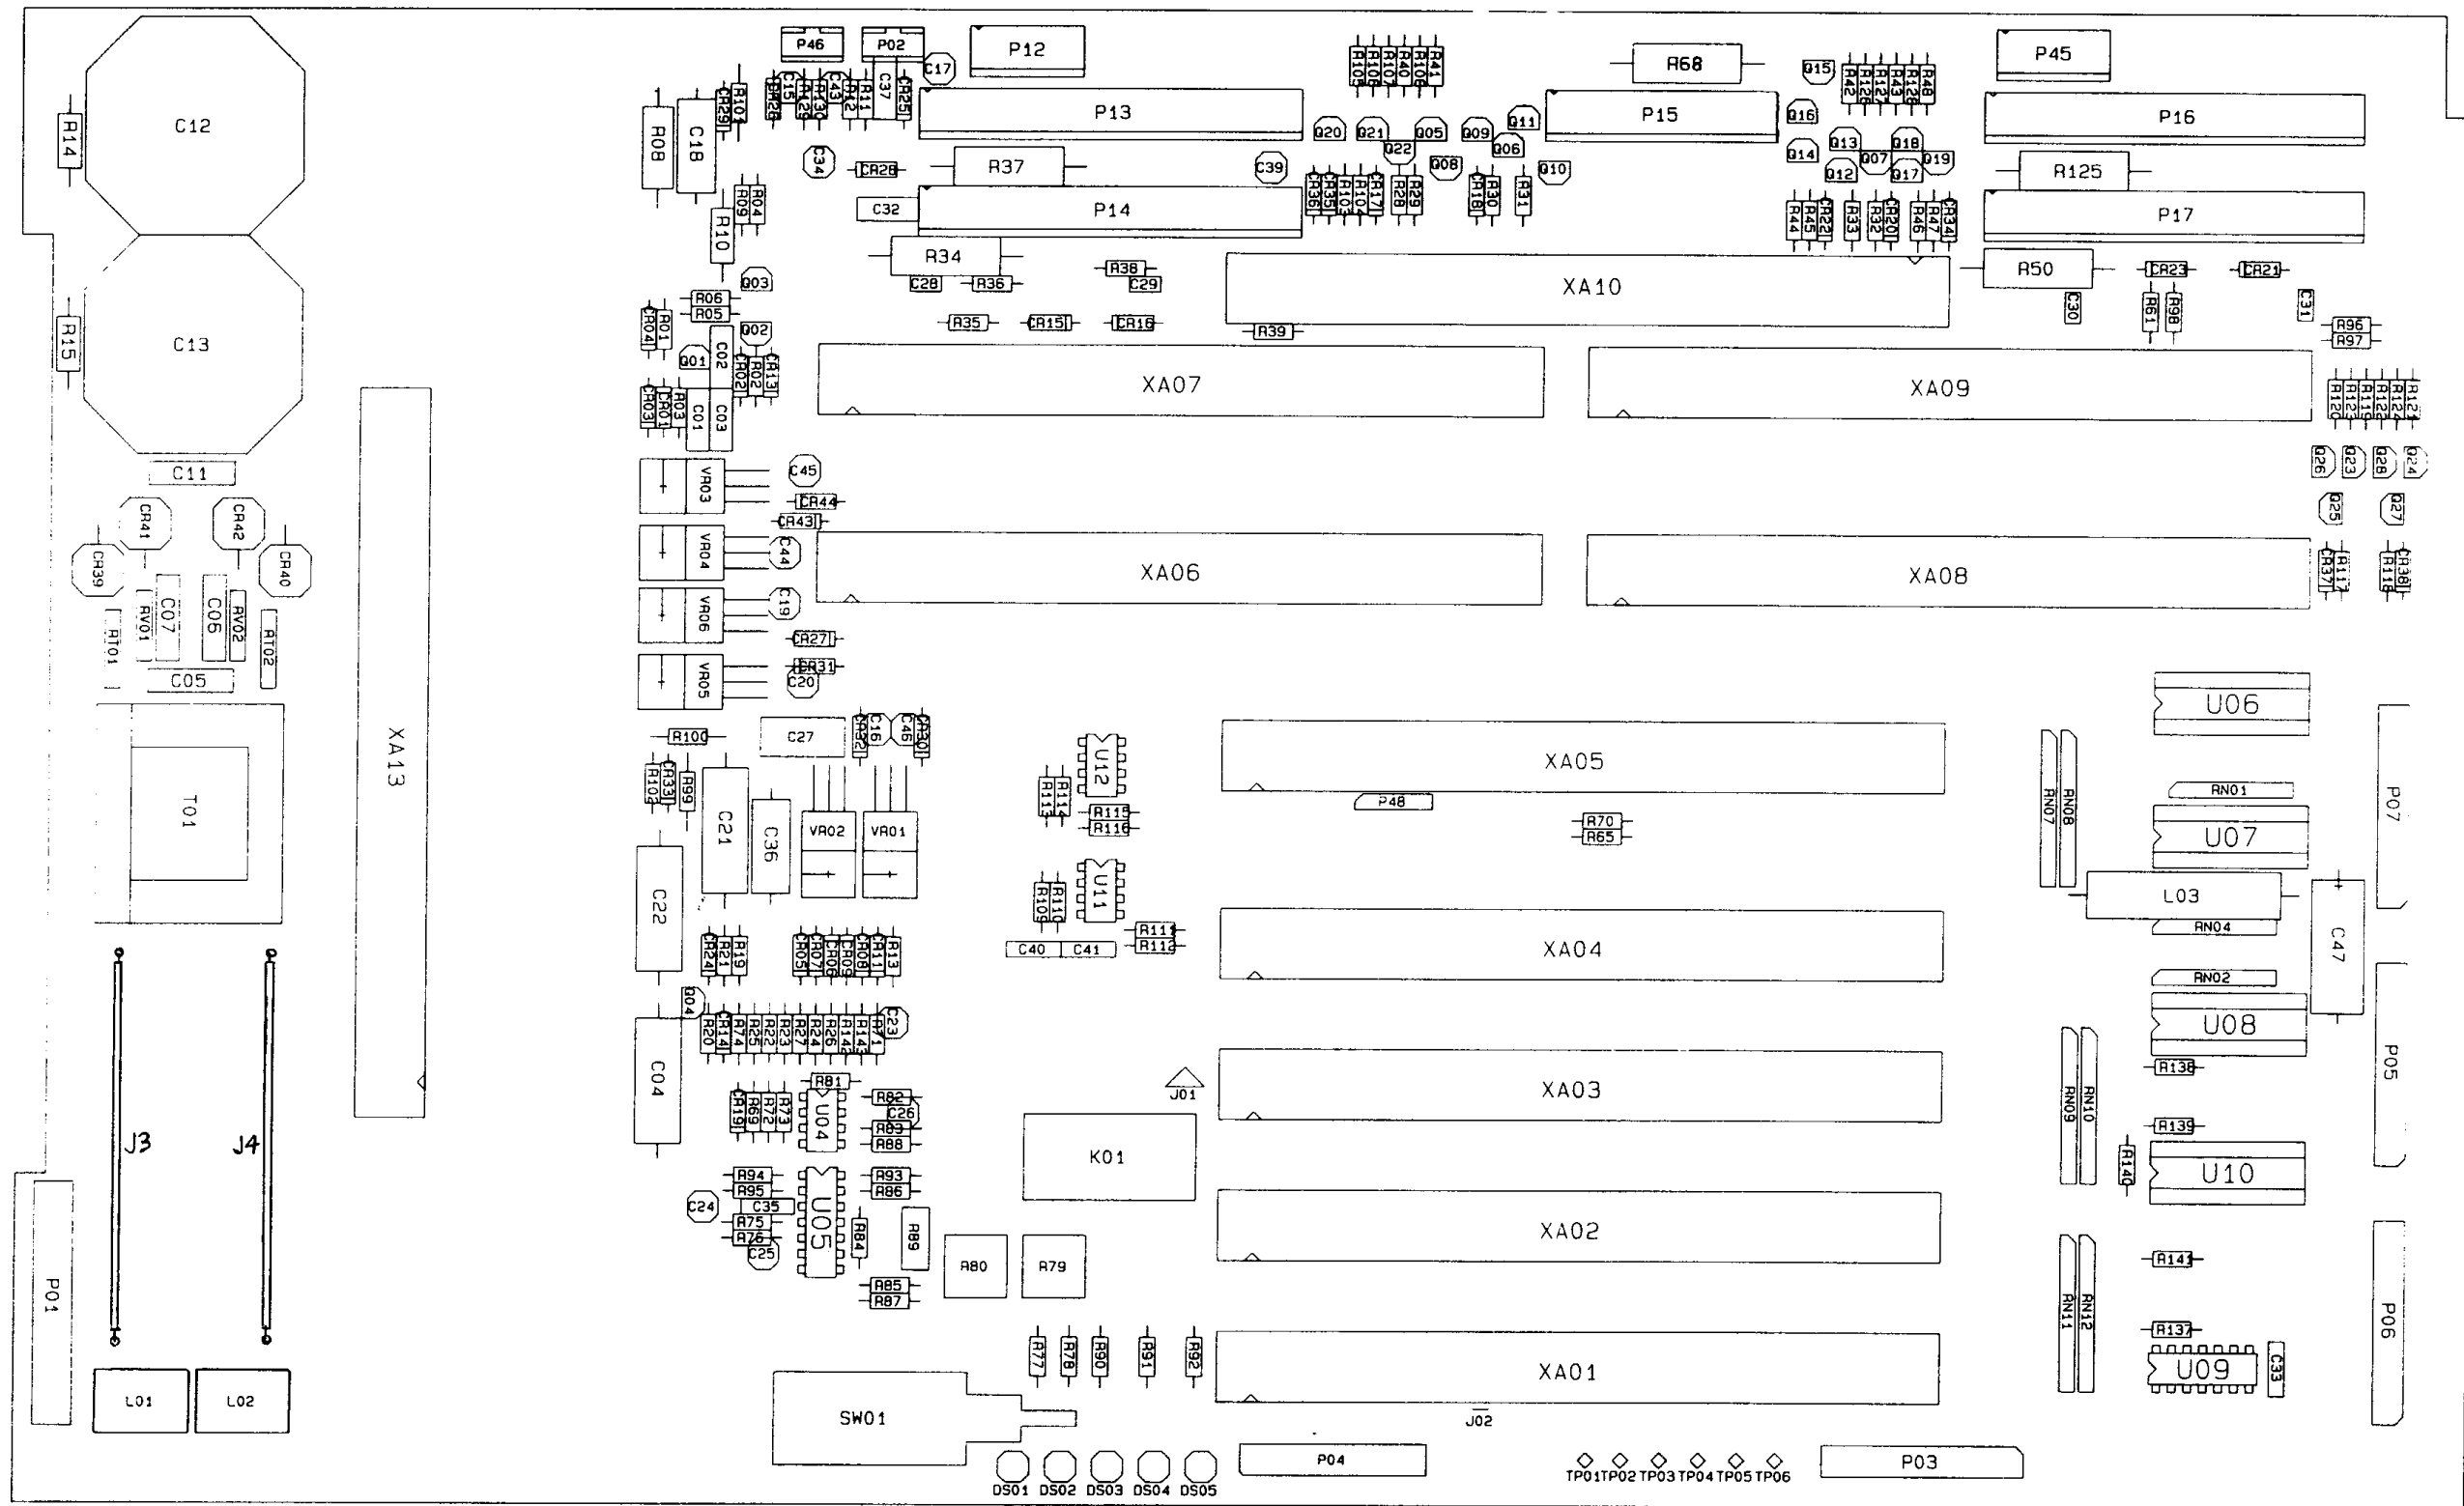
A1A14 Motherboard PCB Parts Locator, Ass'y D34714-3
